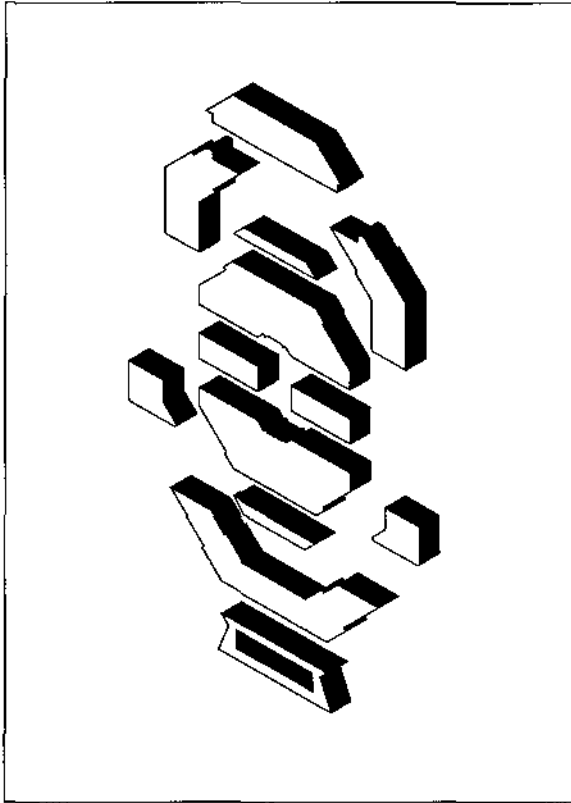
Exploded view of the iron block structure of the end-cap magnet
